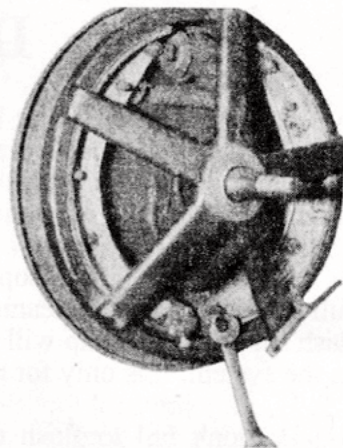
Using ring gage and feeler to make major adjustment on solid shoe.
